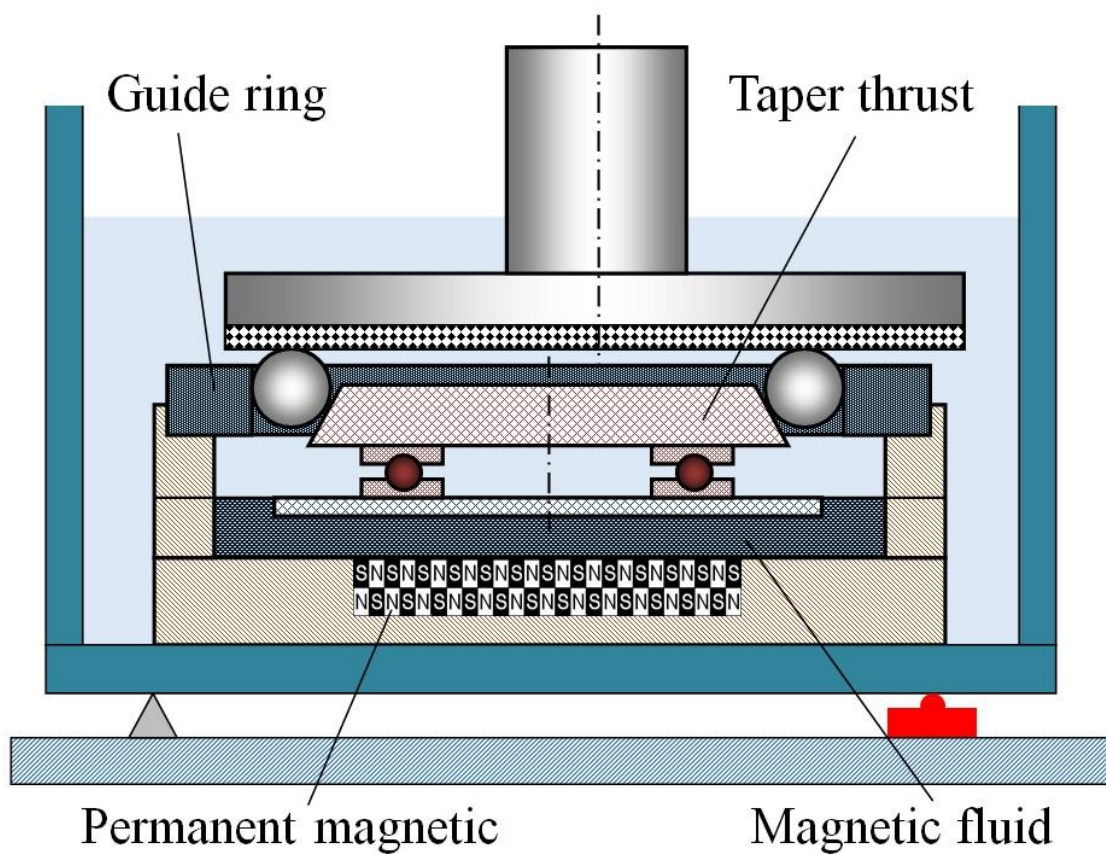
Schematic view of magnetic fluid support grinding machine of ceramic balls [23]
